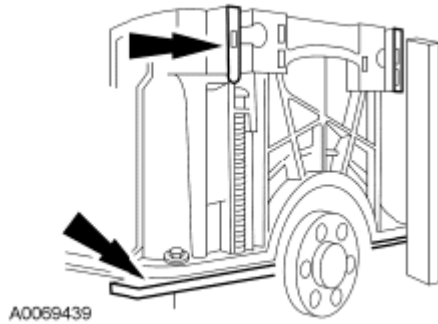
Identifying Transmission Face Of Cylinder Block Cradle With Rear Face Of Cylinder Block
